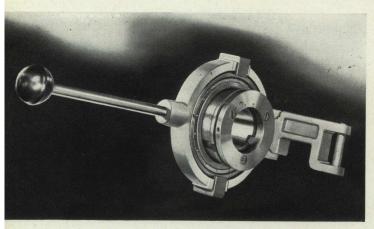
Quick-Acting Collet Closer Removed from Machine
